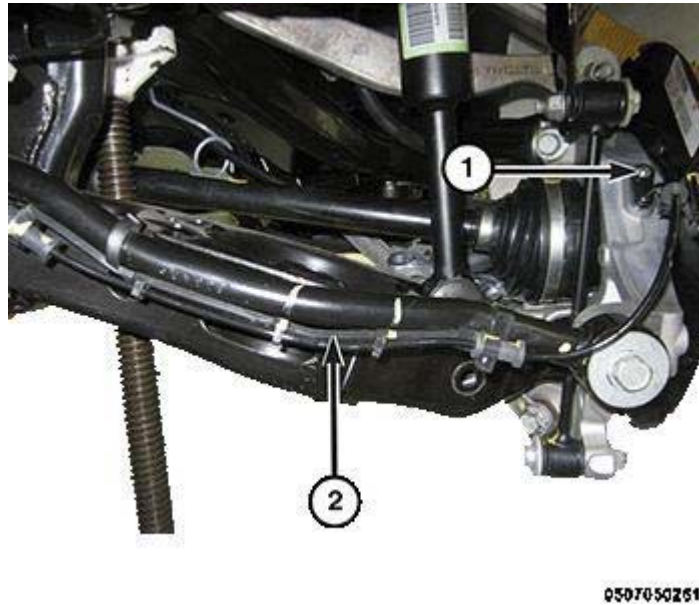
Wheel Speed Sensor (WSS) & Bolt
